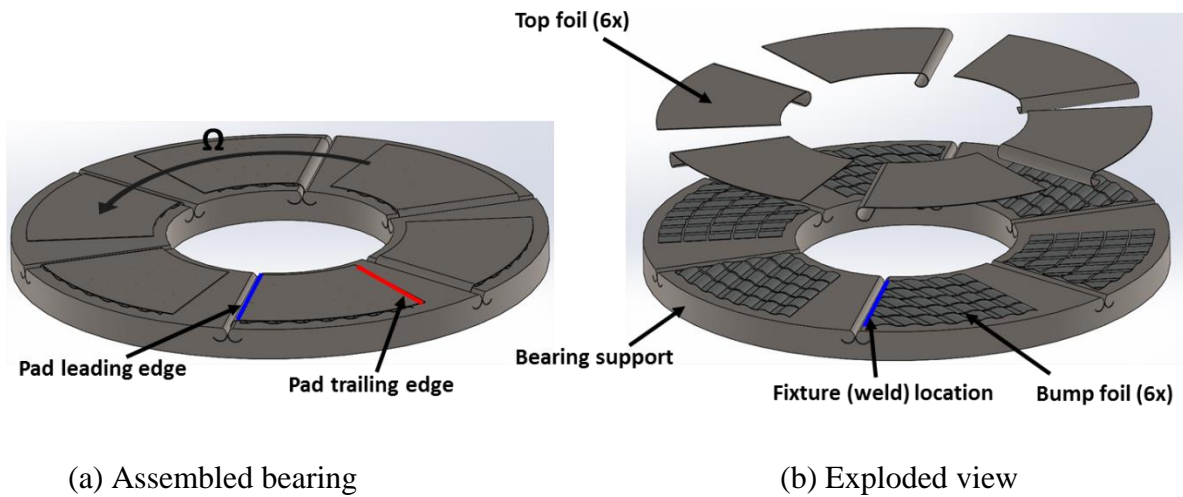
Schematic of a bump type foil thrust bearing with six pads.
